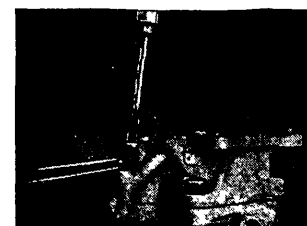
Remove pump discharge ball retainer and gasket, and check ball
